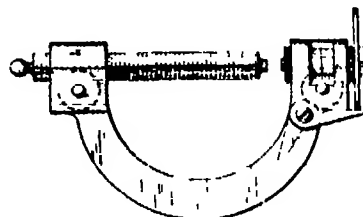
Micrometer calipers that takes the place of several tools, patented by G. Cousins
